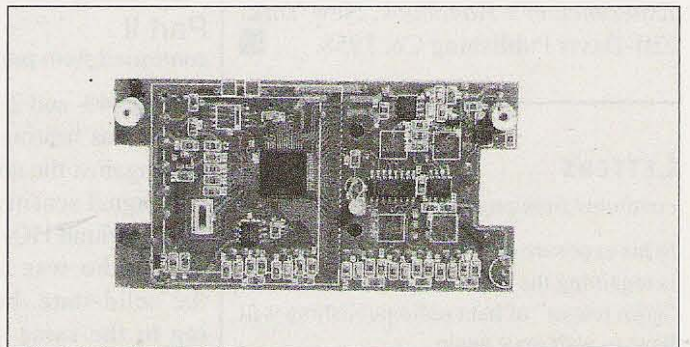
Photo N. This is an example of a modern printed circuit board using LSI technology where the wiring is "flying in formation" as was used during very early circuit construction.
